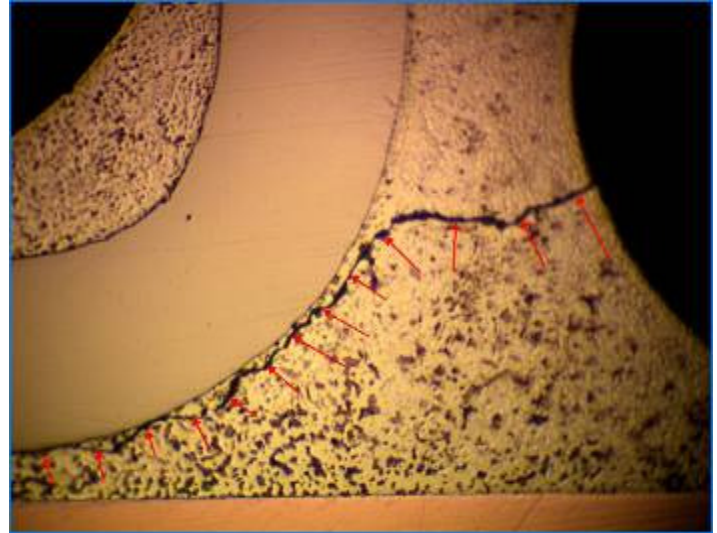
cross section, SN63, U61, left lead solder crack, 200xb
